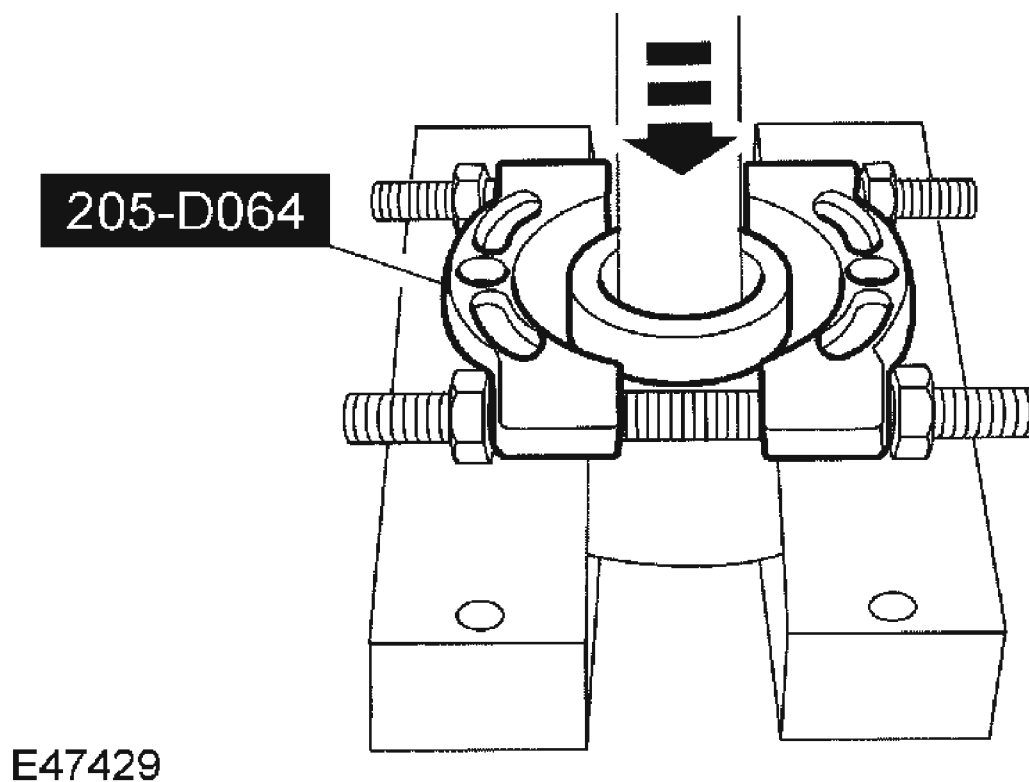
Removing Intermediate Shaft Bearing Using Special Tool
